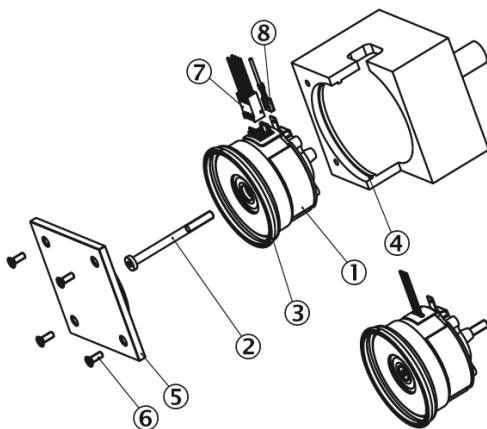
Mounting figure of SRS50S/SRM50S, conical shaft, rubber support
